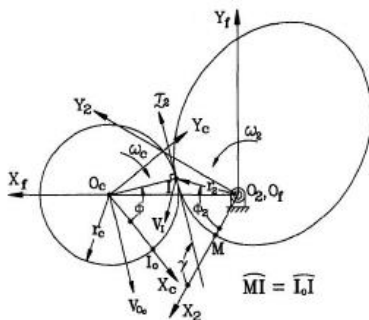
Kinematics of the non-circular gears process, with cutting-wheel [31]
